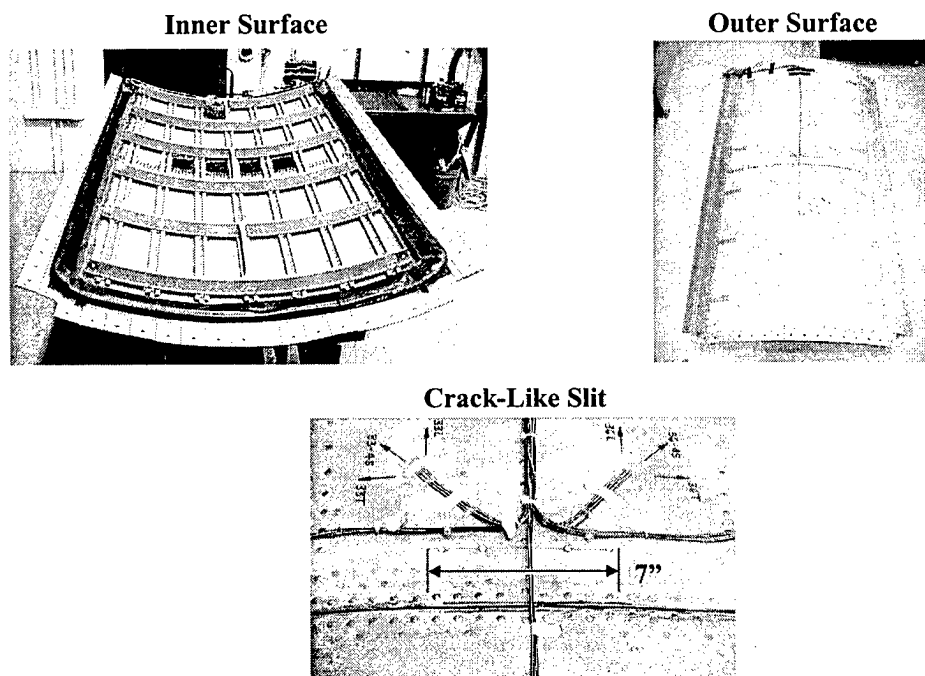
PHOTOGRAPHS OF PANEL CVP3 SHOWING THE INNER AND OUTER SURFACES AND THE INITIAL CRACK-LIKE SLIT
